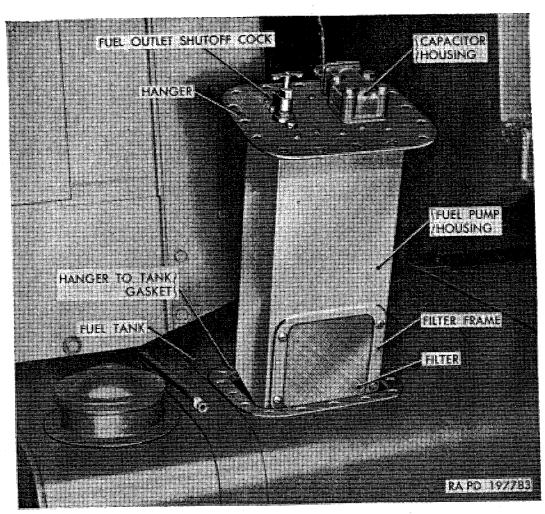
Fuel pump, hanger, and housing removed, exposing fuel filters.
